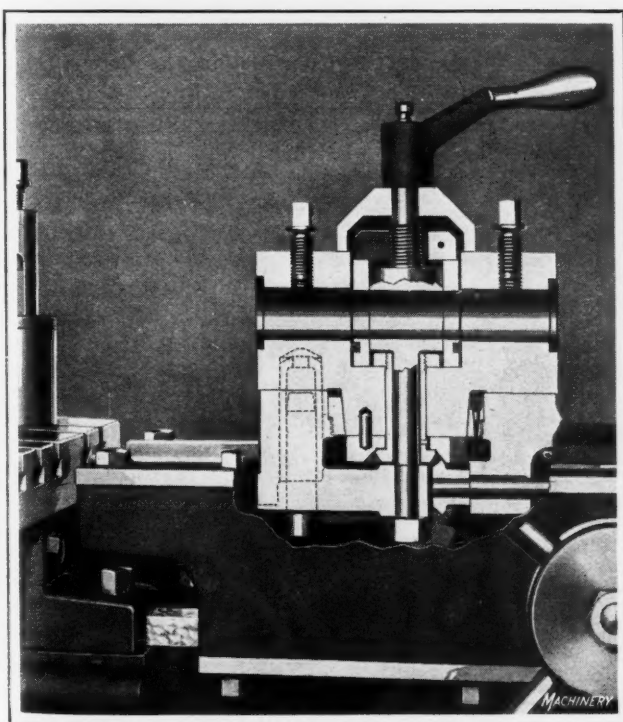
Sectional View of the Turret, showing the Indexing and Locking Means and Hole through the Turret
